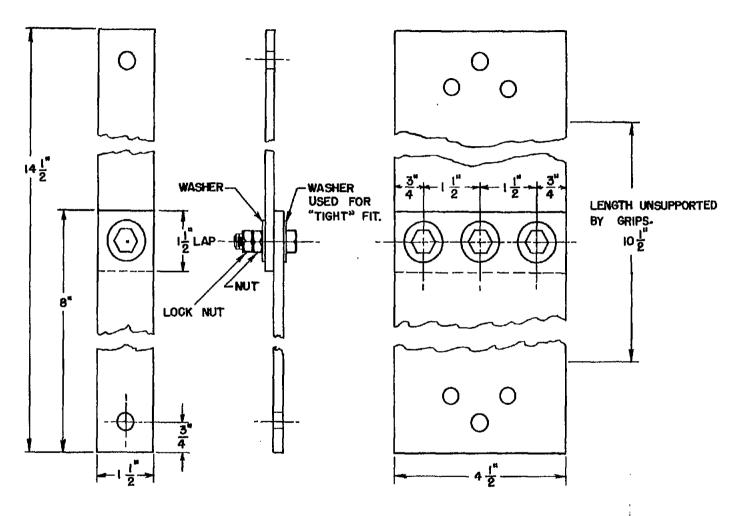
TYPICAL BOLTED - JOINT FATIGUE TEST SPECIMENS USED AT BATTELLE.
